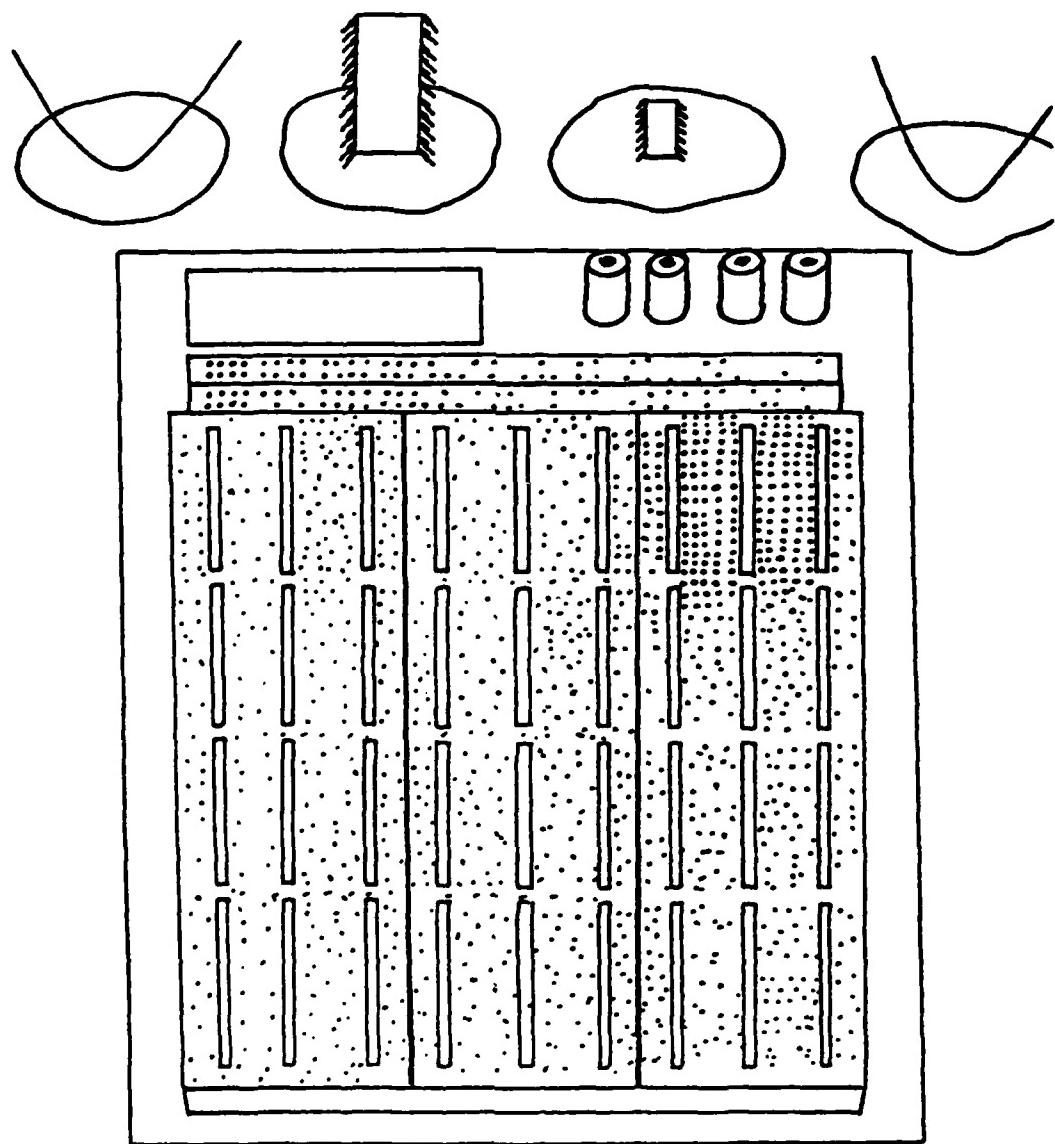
Components of Wire and Chip Insertion Assembly Task
